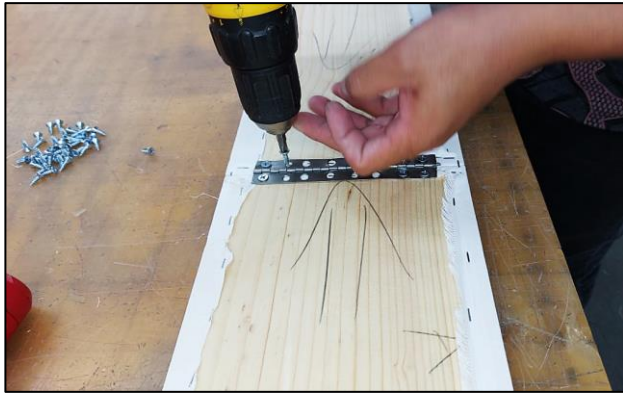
, 12 and 13. Proposed Hinge Assembly Test
